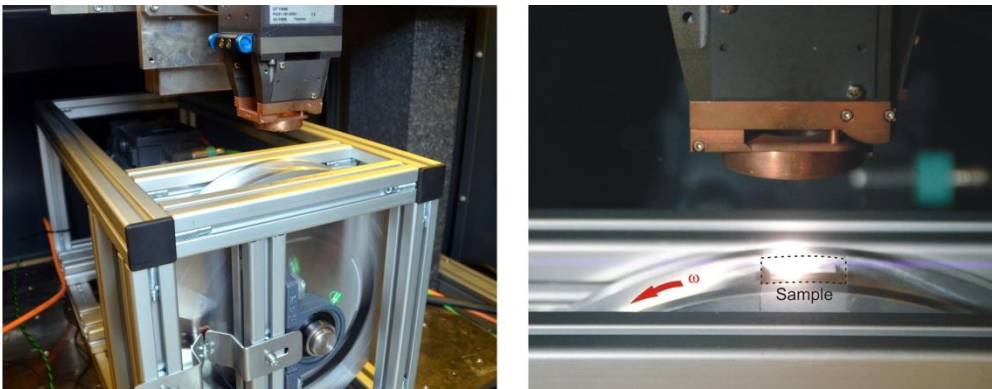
Mobile high speed setup: Rotating cylinder with sample below a multi-kW fiber laser. Overview (left) and machining zone (right).
